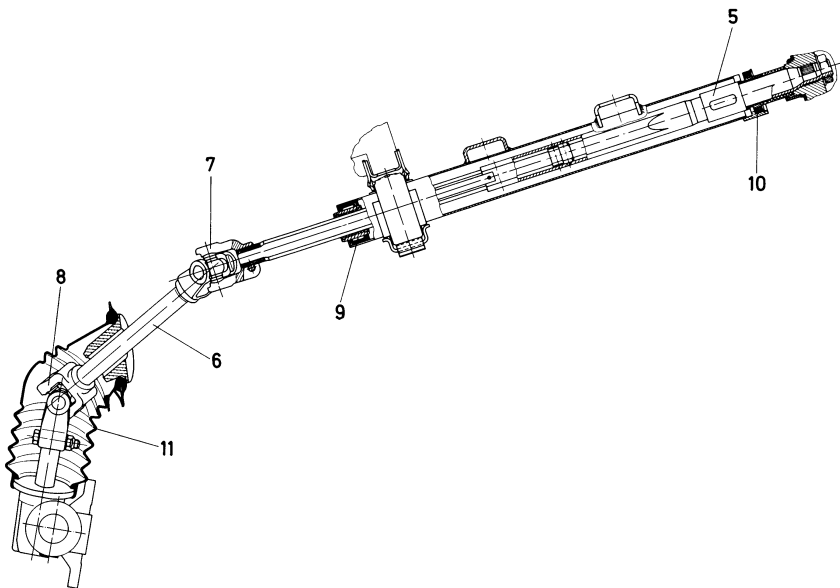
Steering column of the VW Golf III and Vento (1996). The collapsible steering tube (Fig. 4.27) is carried from the bottom by the needle bearing 9 and through the top by the ball bearing 10 in the jacket tube; the spigot of the steering lock grips into part 5. The almost vertical pinion gear of the rack and pinion steering is linked to the inclined steering tube via the intermediate shaft 6 with the universal joints 7 and 8. The dashpanel is sealed by the gaiter 11 between this and the steering gear (illustration: Lemförder Fahrwerktechnik).
